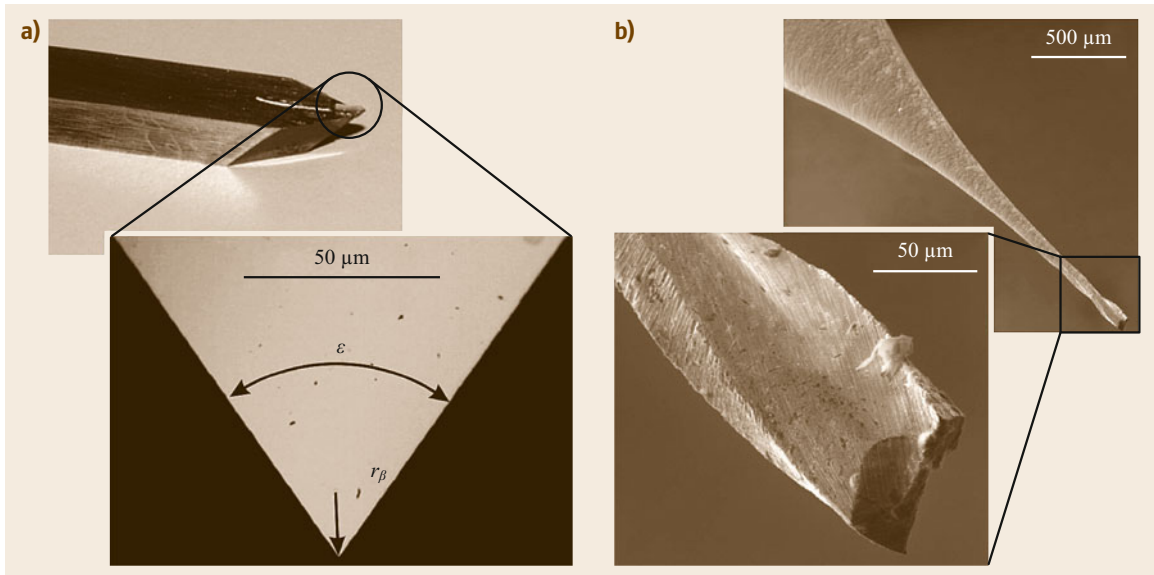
,b Microcutting tools for turning (source: LFM, Bremen) and milling (source: IPK, Berlin; after [12.27, 34]). (a) Monocrystalline pointed diamond tool, nose angle ε : $70^\circ 30'$, cutting edge radius r_β : $< 50 \text{ nm}$; (b) micro end mill $D = 0.1 \text{ mm}$, cemented carbide substrate, coating: TiAlN
